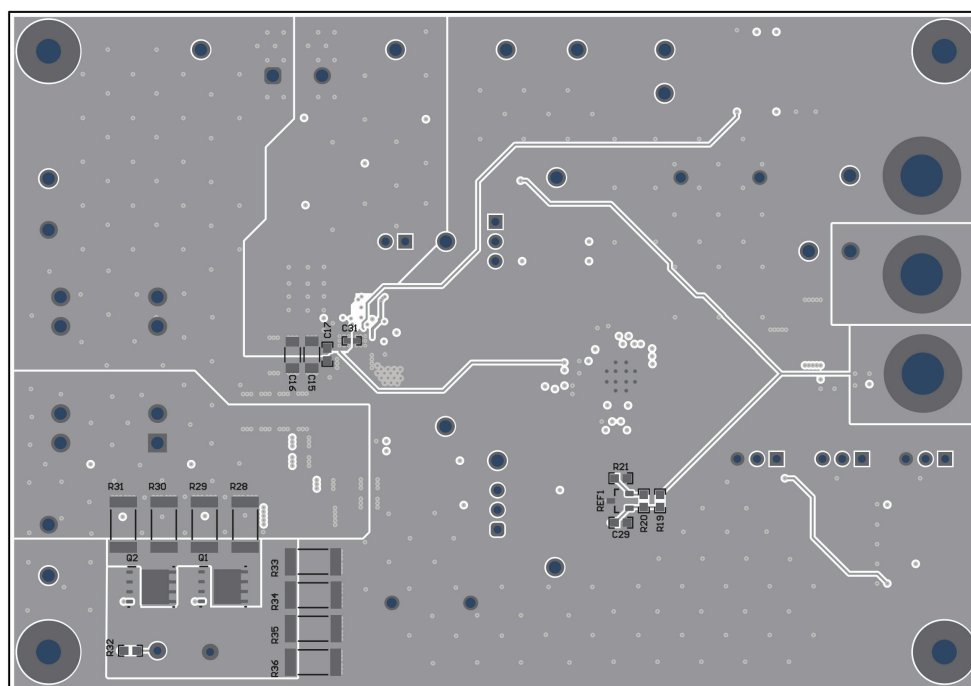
SR146A CSD967201-Q1EVM Bottom Component (Bottom View)
